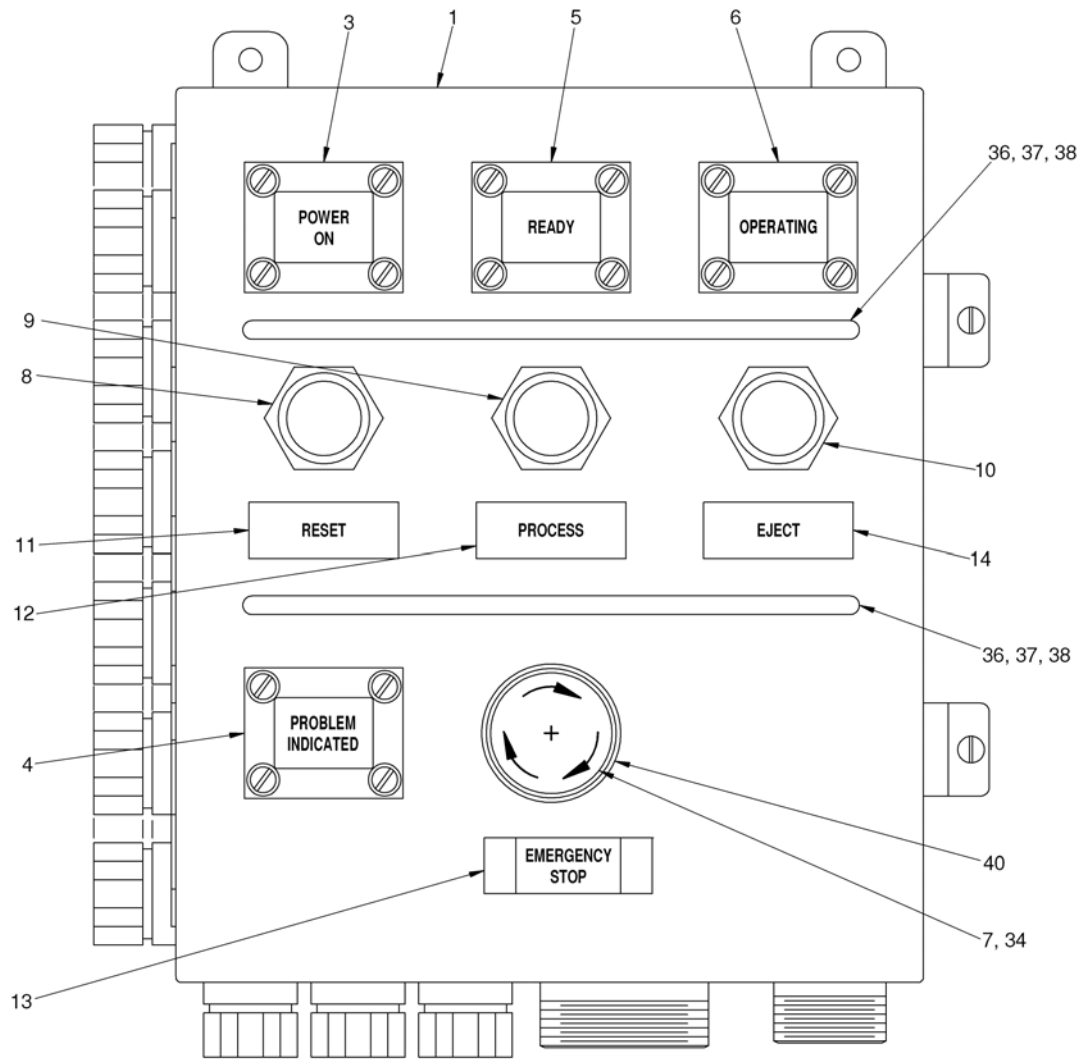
K (Sheet 1 of 2). CMU Front Electrical Enclosure subassembly
